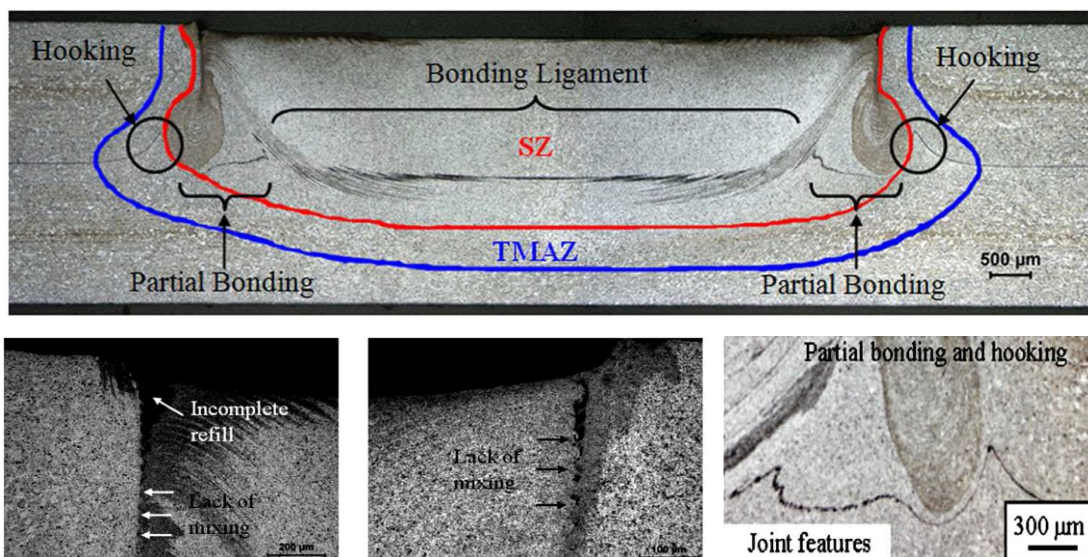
Macrographs of RFSSW joint cross-section showing detrimental weld zone, geometric/metallurgical features and weld defects (Rosendo, et al., 2011; Rosendo, et al., 2015).
